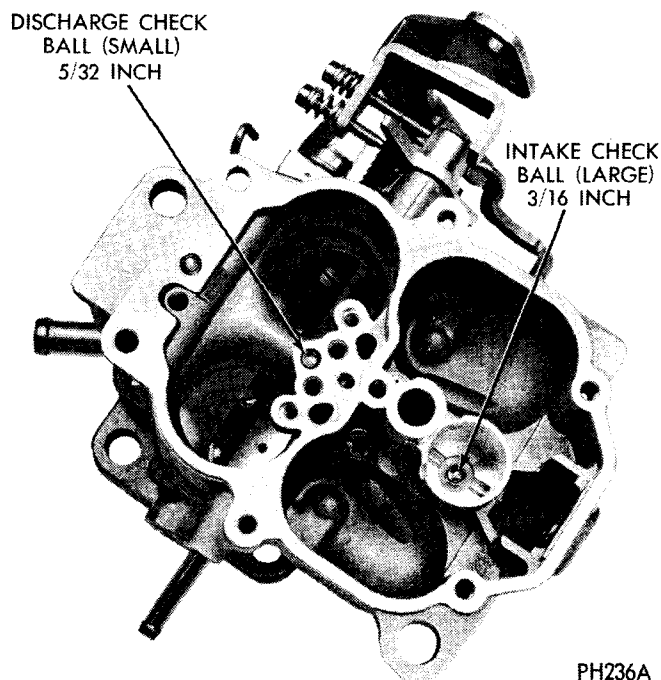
Installing Accelerator Pump Intake and Discharge Check Balls
